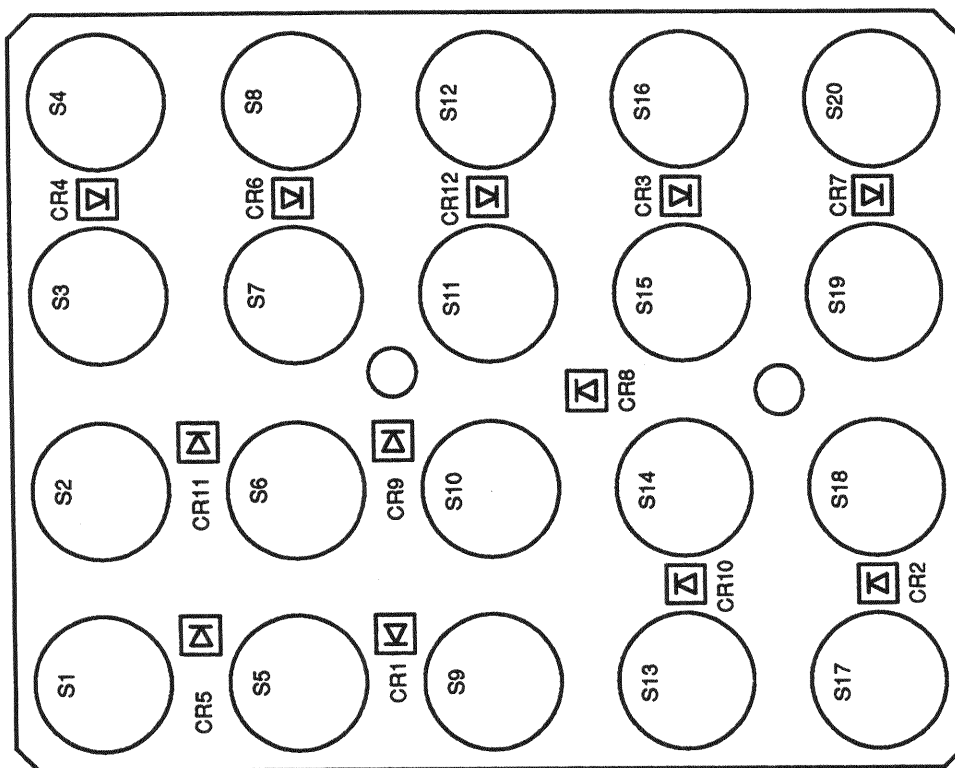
A10A2 Keypad Assembly Component Location Diagram (10303-2110 Rev. A)
